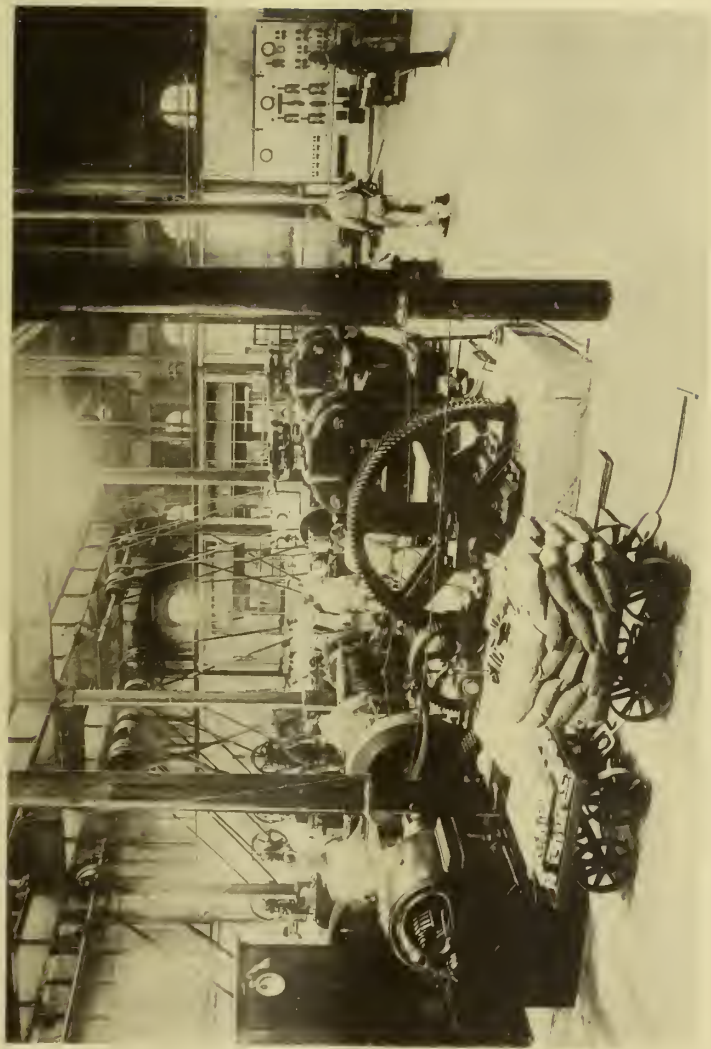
SILVER ROLLING ROOM, Imperial Mint, Osaka. Showing Break-down Mill, with Reduction Gears uncovered.
